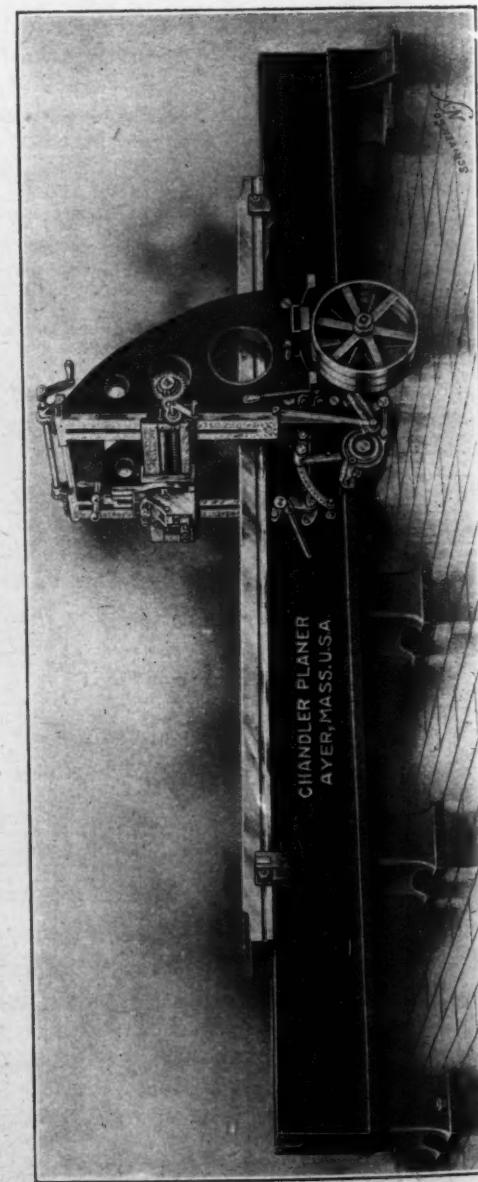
HIGH SPEED PLANER.—CHANDLER COMPANY.
